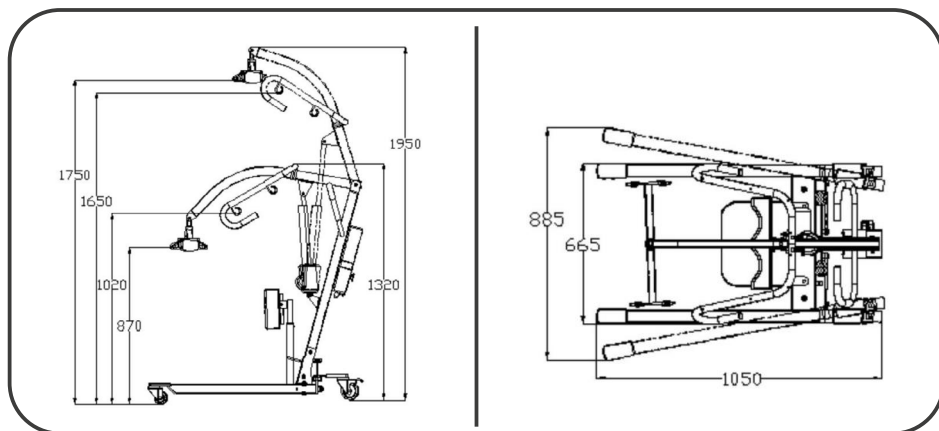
Diagram drawing with lift dimensions in millimetres.
